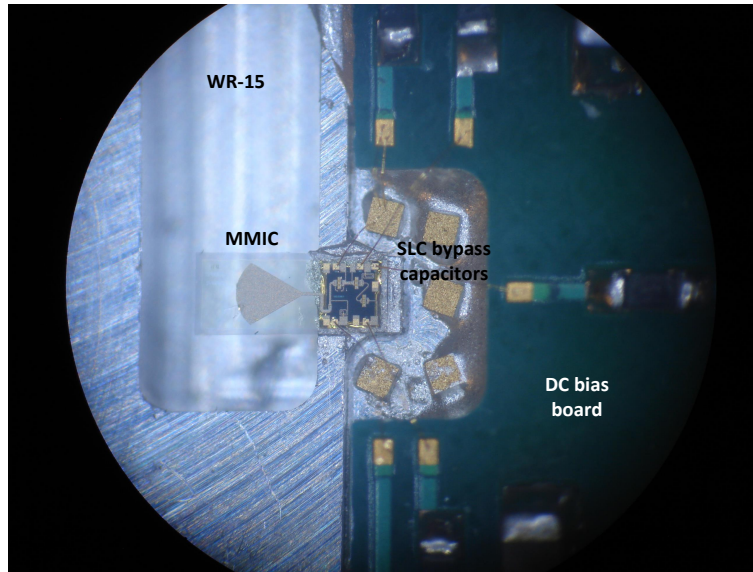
Complete V-Band oscillator assembly with MMIC, bypass capacitors, bias board and DC wirebond connections. The waveguide housing is fabricated in Al with traditional machining. The waveguide is WR-15 and made of Al.
